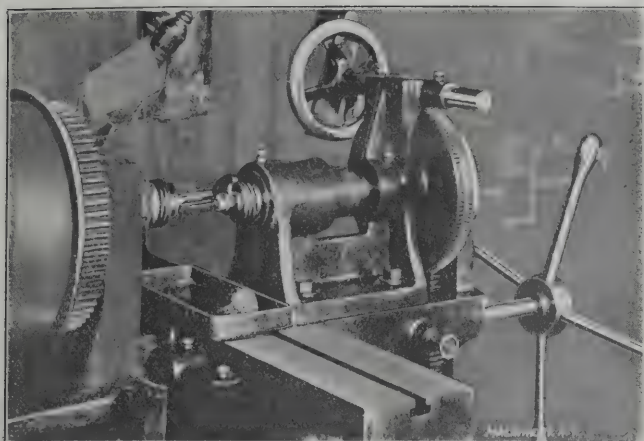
Milling Small Cams on a Machine equipped with Brown & Sharpe Cam Attachment
